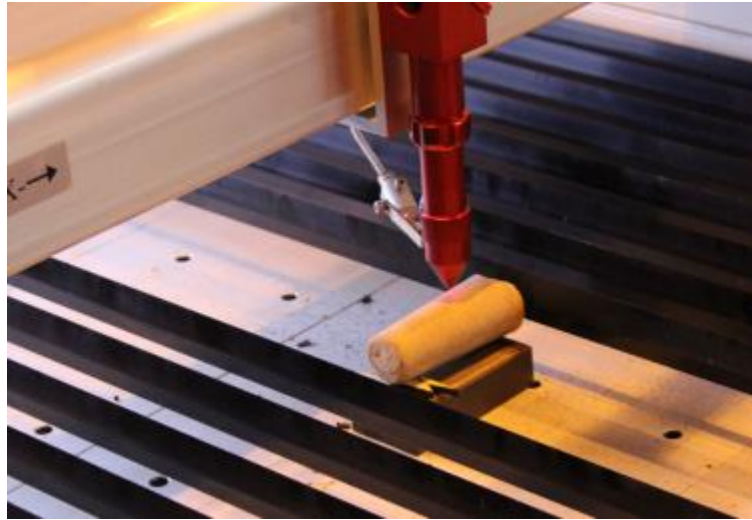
Bodor 120W CO₂ laser cutting and engraving system tested for laser engraving of a cold box sand core.
